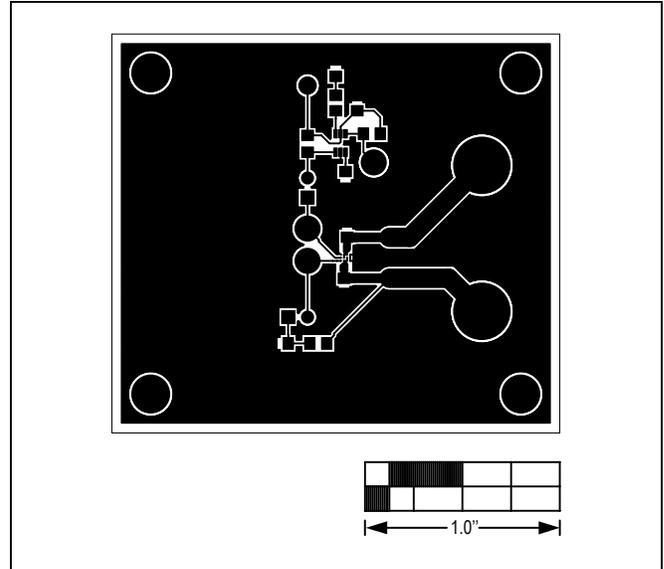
MAX14653–MAX14655 EV Kit PCB Layout—Component Side
